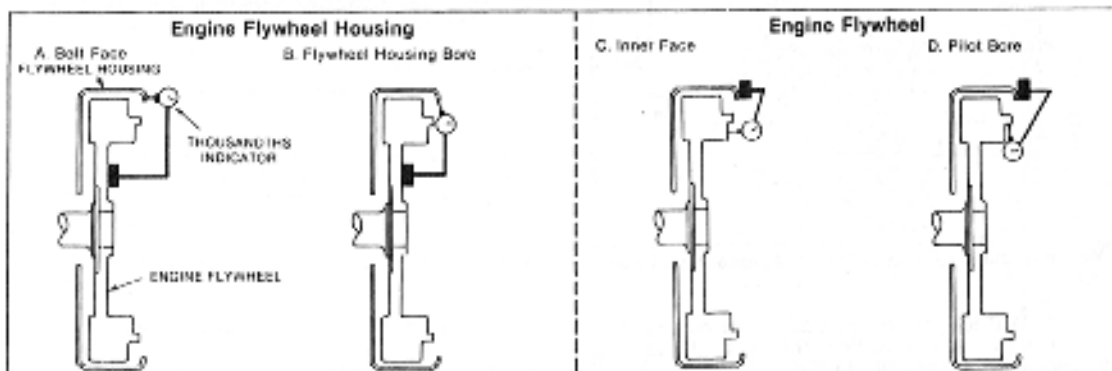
Dial Indicating Flywheel Housing and Engine Flywheel
